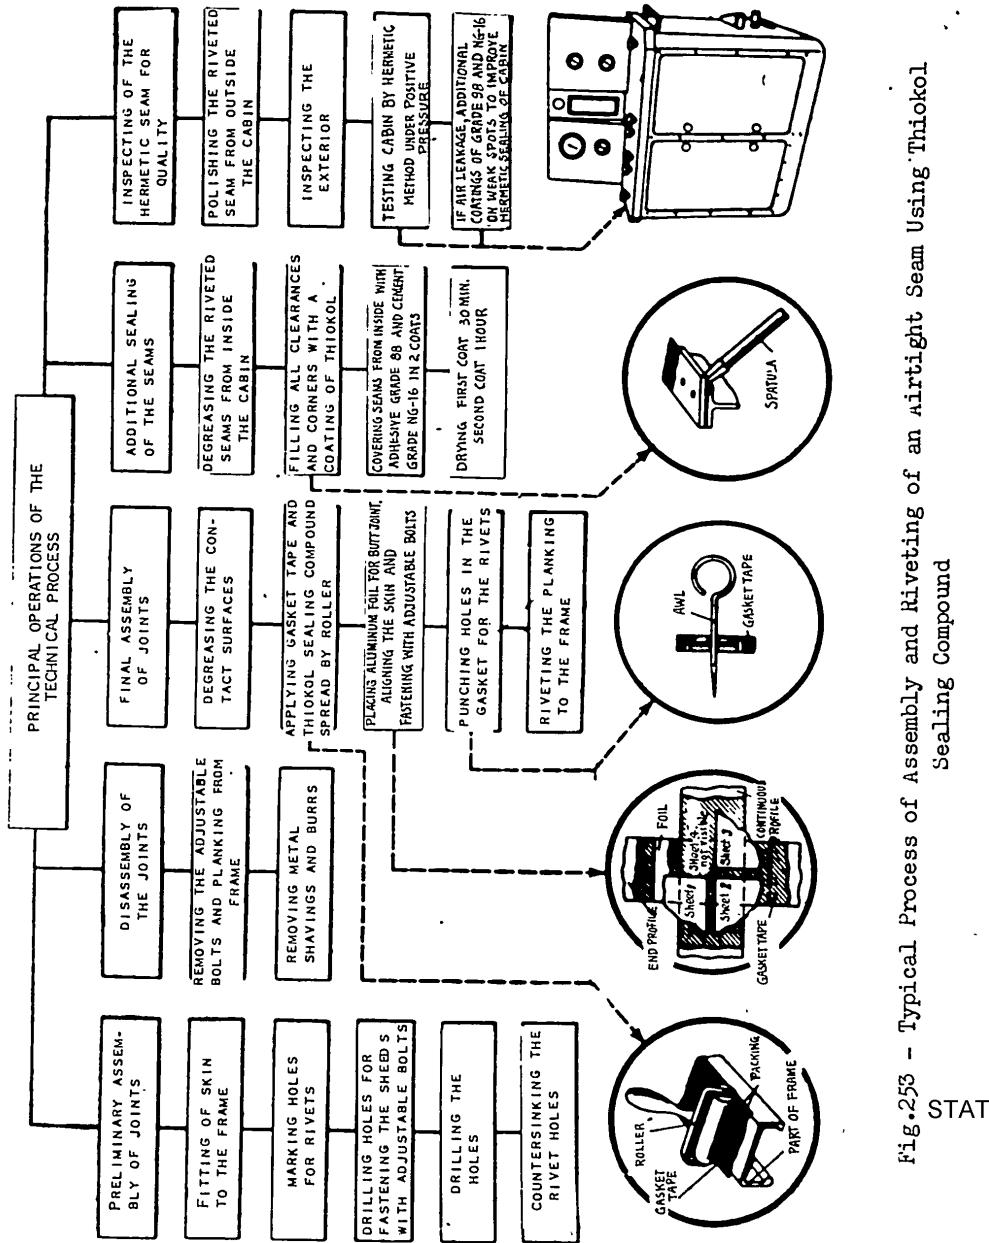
Typical Process of Assembly and Riveting of an Airtight Seam Using Thiokol Sealing Compound
